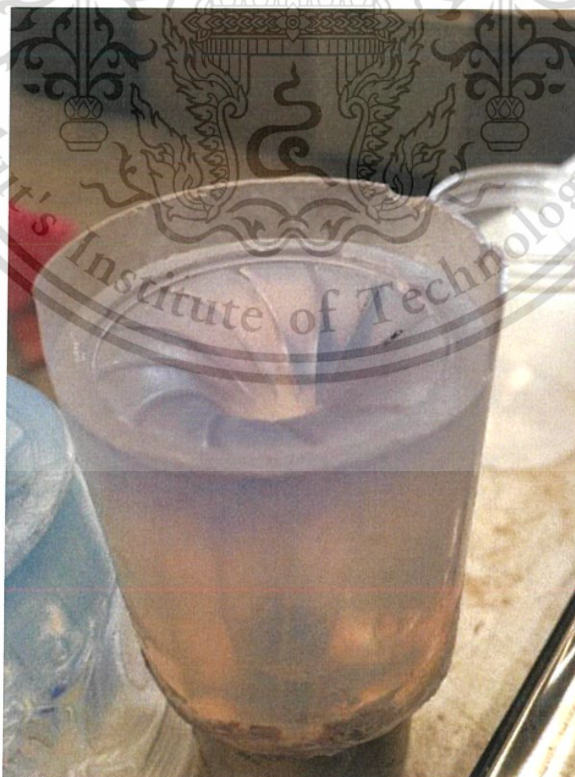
Silicone mold for casting a wax pattern of turbocharger wheel
